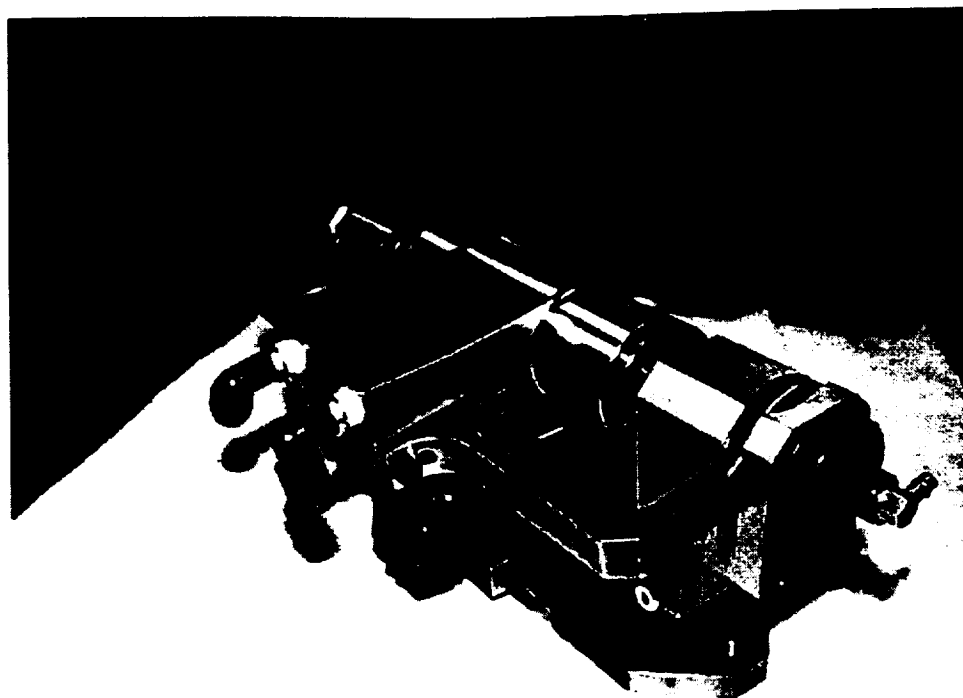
Bottom view of roller cage/trailing shoe assembly. Black connectors at left center are fittings for water cooling of shoe.
